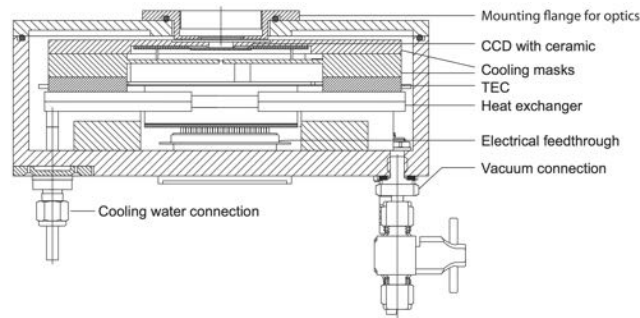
Virtual cross-section of the SLcam<sup>®</sup> vacuum housing showing the chip location, cooling geometry using masks, Peltier elements TEC and a water cooled heat exchanger. Adapted from [3].
